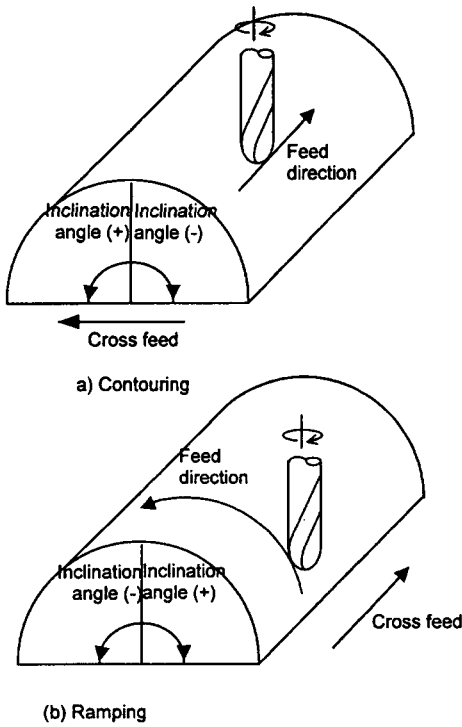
Workpiece geometry and machining scheme of cylinder machining
